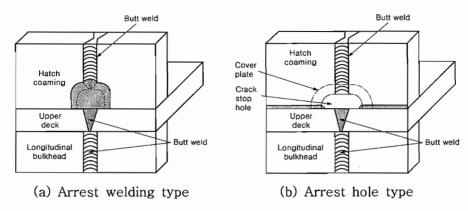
An example of joint arrangement for arresting the brittle crack propagation
